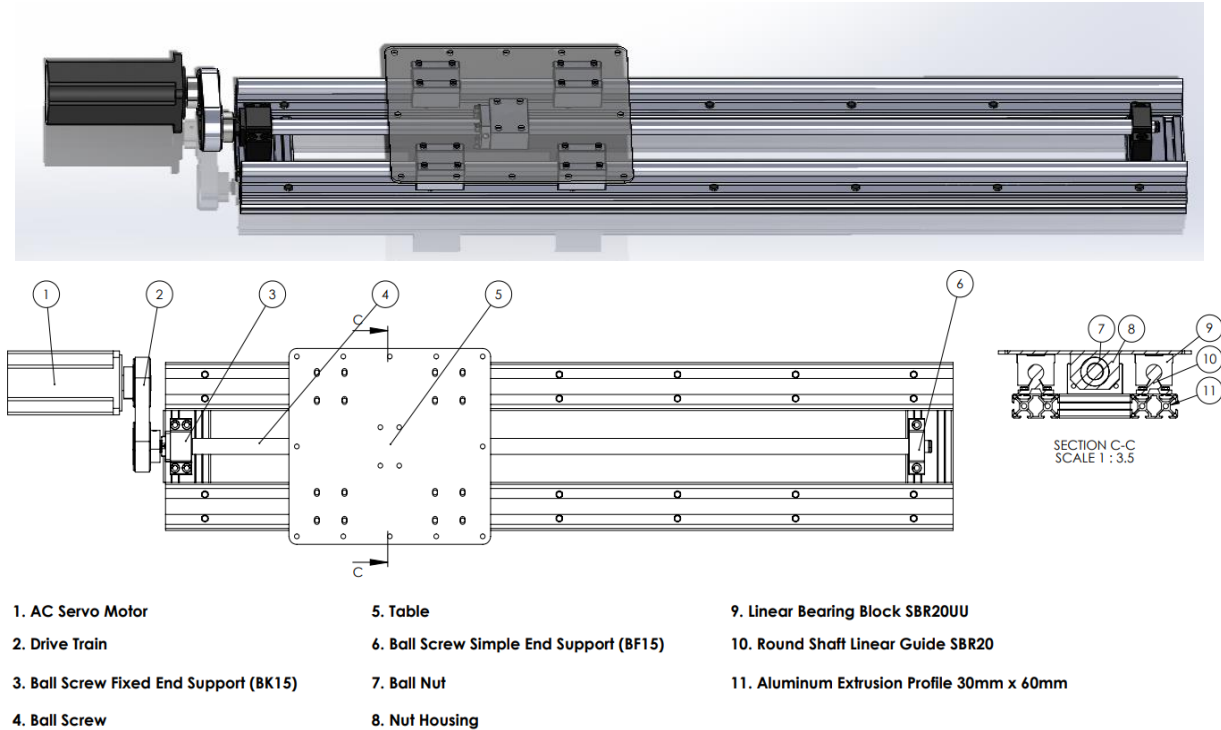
A detailed drawing of the linear slider with a section showing the connection of the worktable to the ball screw.
